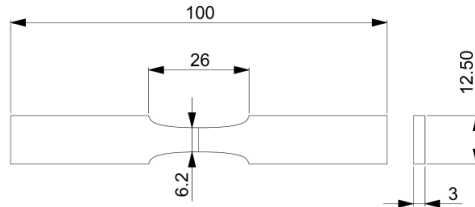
Dog-bone shape specimen with a central joint for tensile test (dimensions in mm)
